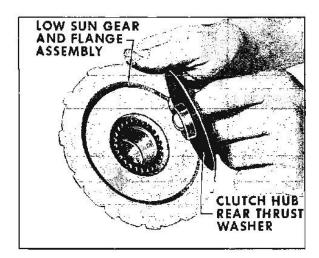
Installing Clutch Hub Rear Thrust Washer
